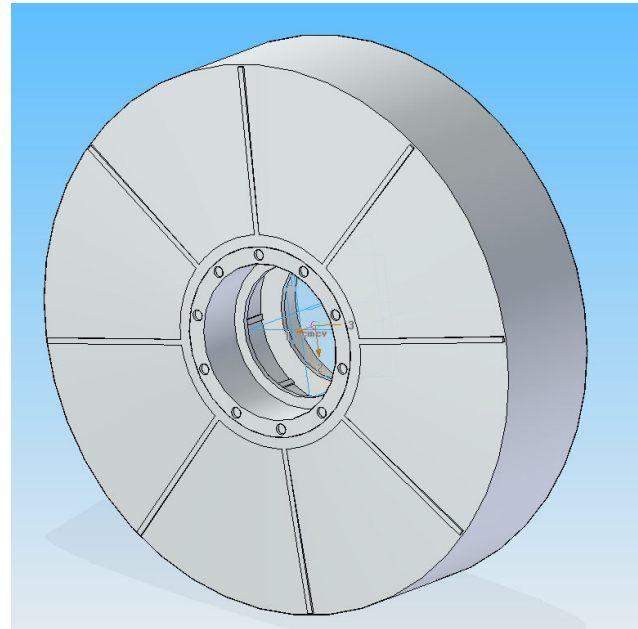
The patented, box-welded wheel without the steel protections and the rubber band.
